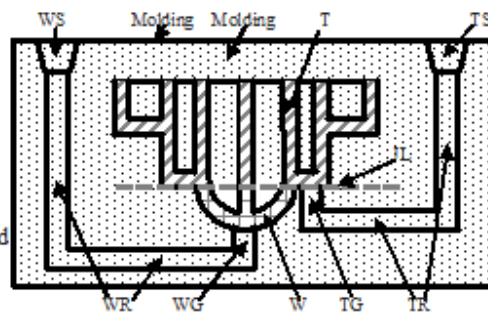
Molding box for integrated casting (full mold casting process) (schematic diagram)
